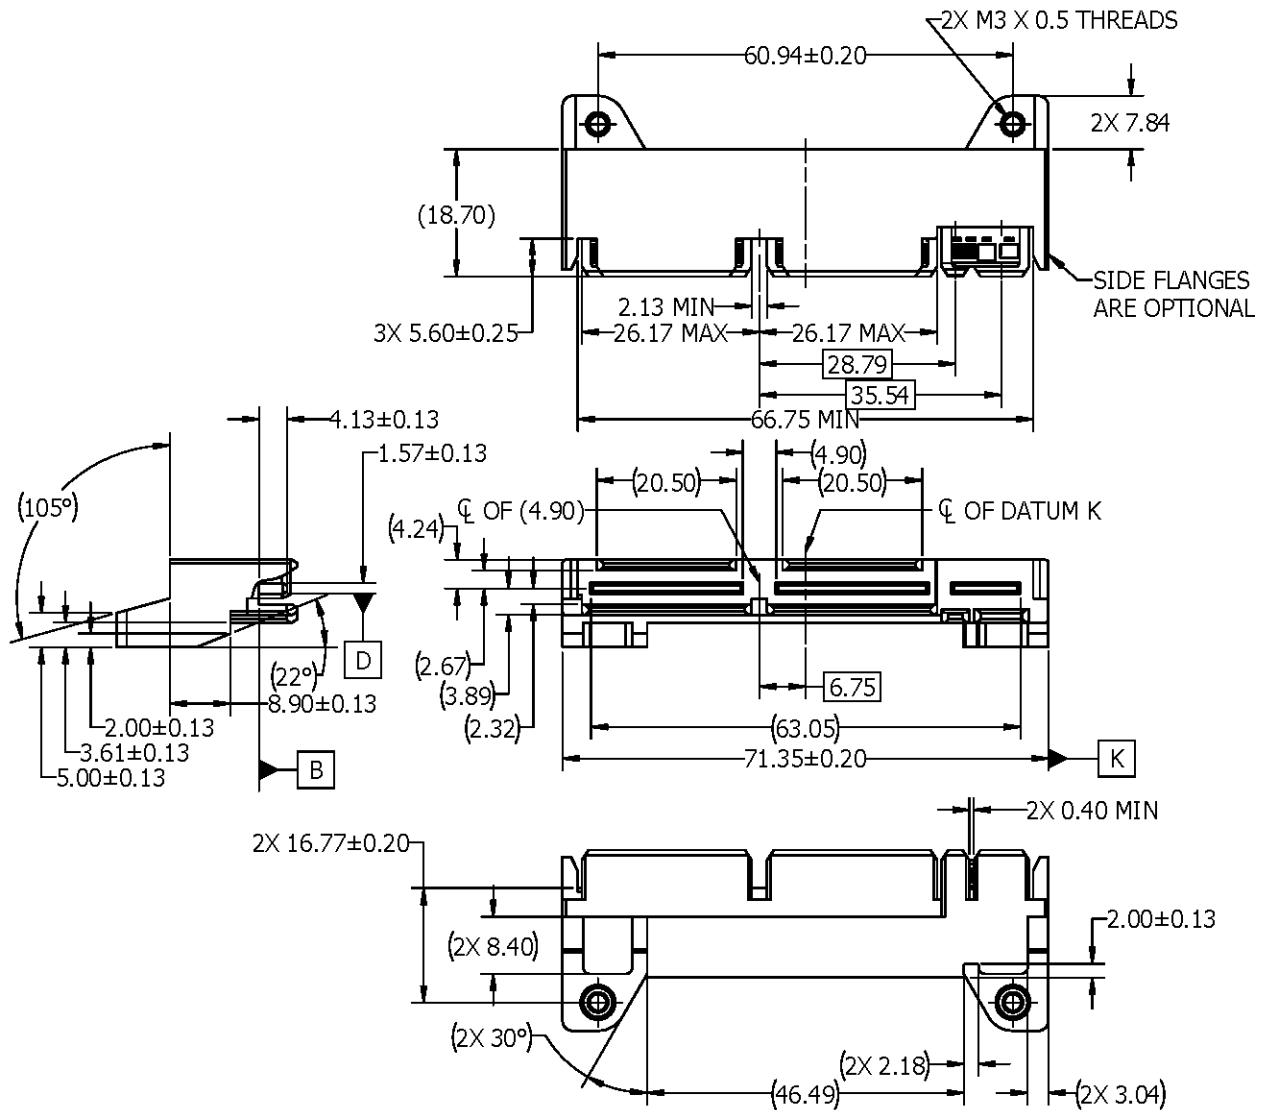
Combo x16+21A Power RSTR Panel Mount Plug
